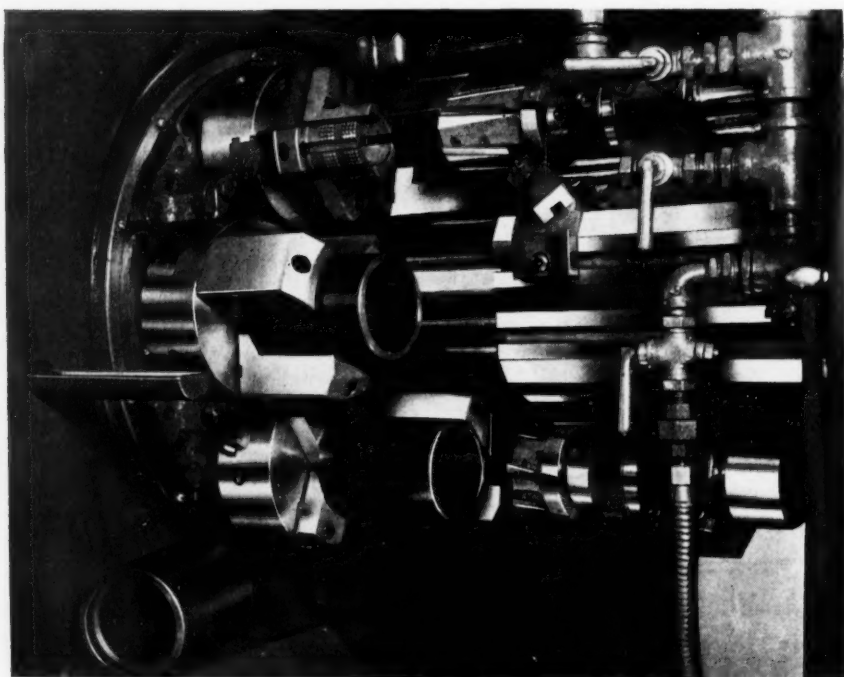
Two Different Sets of Chucks in Alternate Positions on this Automatic Enable Both Ends of Couplings to be Machined in Two Passes through the Machine
